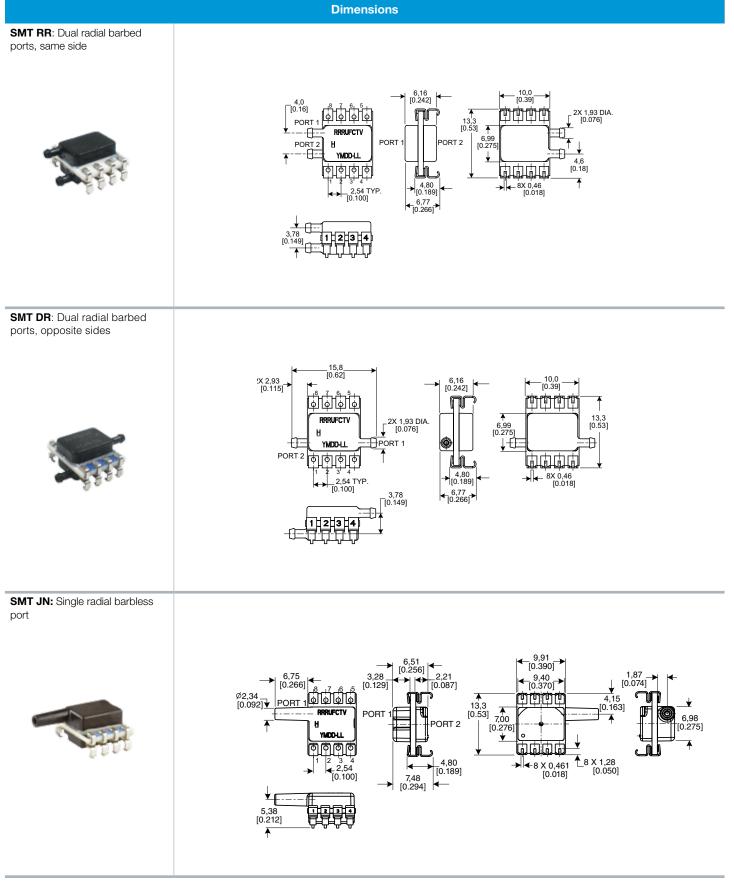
SMT Package Dimensional Drawings (For reference only: mm [in].)
